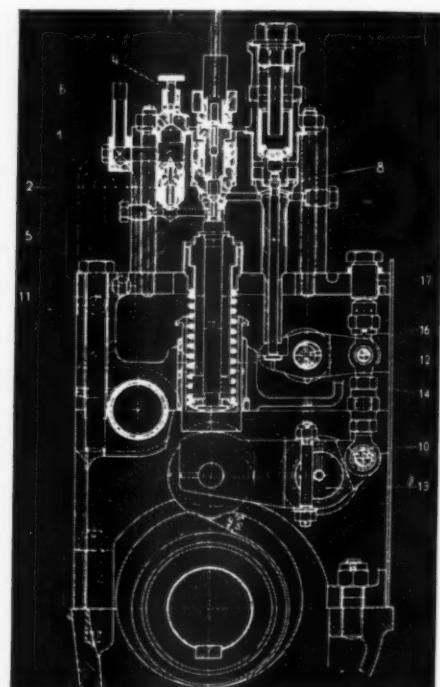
Injection pump for M.A.N. single acting 4-cycle Diesel: 1—Fuel intake line. 2—Intake valve. 3—Finger for holding intake valve open. 4—Air release screw. 5, 6—Delivery valves. 7—Fuel delivery line. 8—Spill valve. 9—Roller. 10—Forked lever. 11—Spring. 12—Lever for spill valve. 13—Lever fulcrum. 14—Adjuster element. 16—Governor shaft. 17—Adjusting screw.
